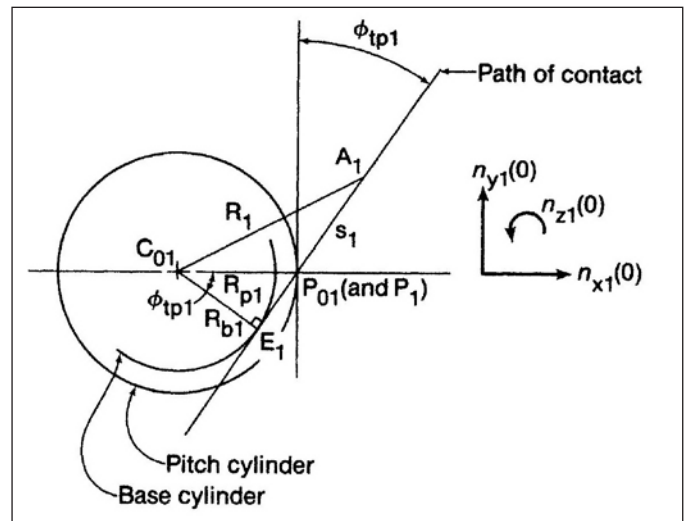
Pitch cylinder of gear 1 viewed along the gear axis (Ref. 3).
